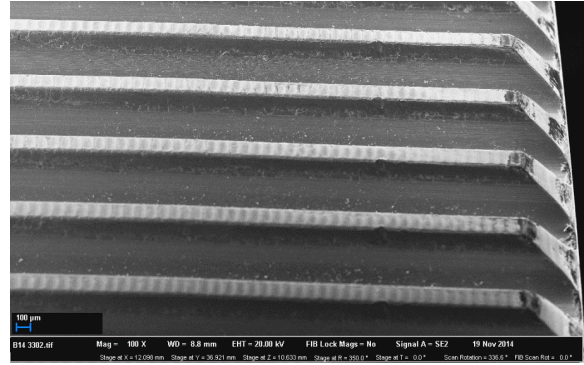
SEM image of the tothing of a gear of 1<sup>st</sup> CV, after failure in vacuum endurance testing.
